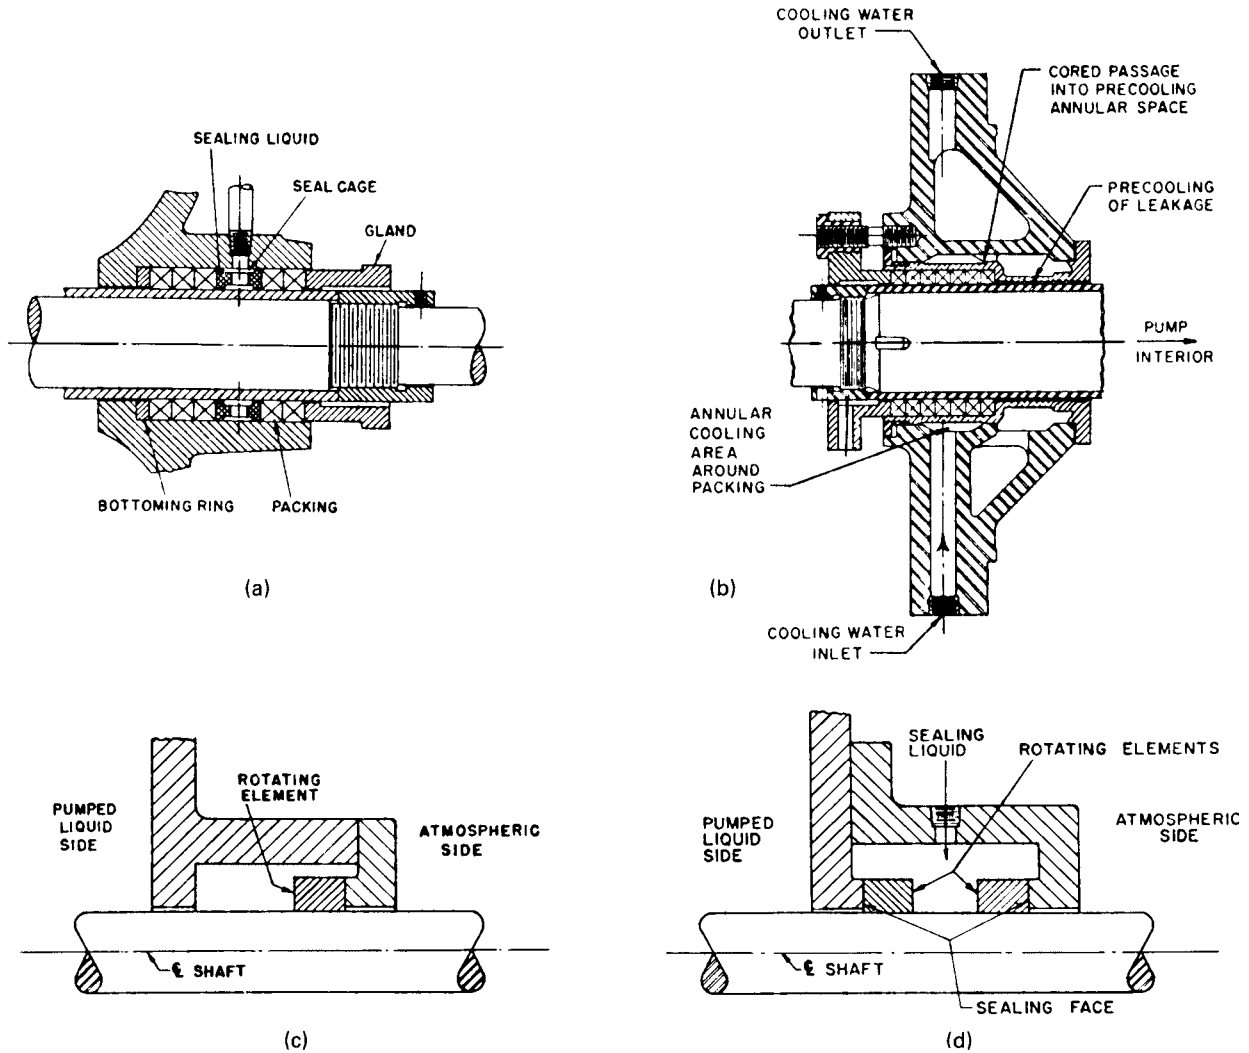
Types of seals for pump shafts. (a) Packed stuffing box; the sealing liquid may be from the pump discharge or from an independent source. (b) Water cooled stuffing box. (c) Internal assembly mechanical seal; the rotating and fixed surfaces are held together by the pressure of the pump liquid which also serves as lubricant; a slight leakage occurs. (d) Double mechanical seal with independent sealing liquid for handling toxic or inflammable liquids.
